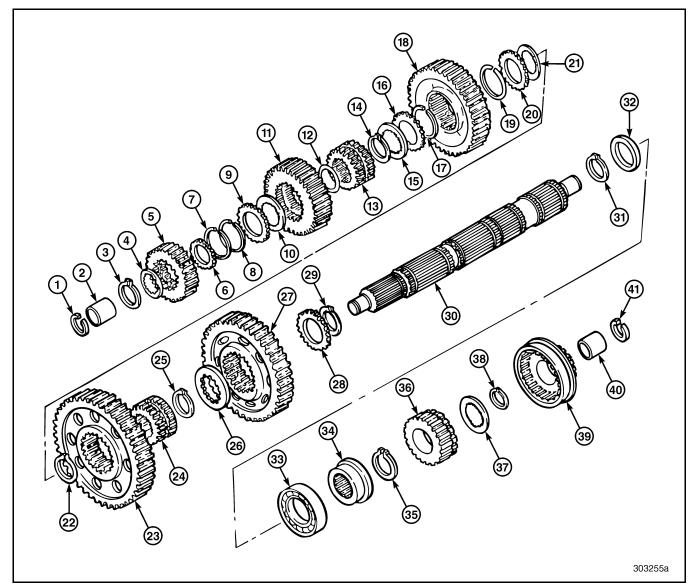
View of Mainshaft and Gears (T313L/T318L Shown)
